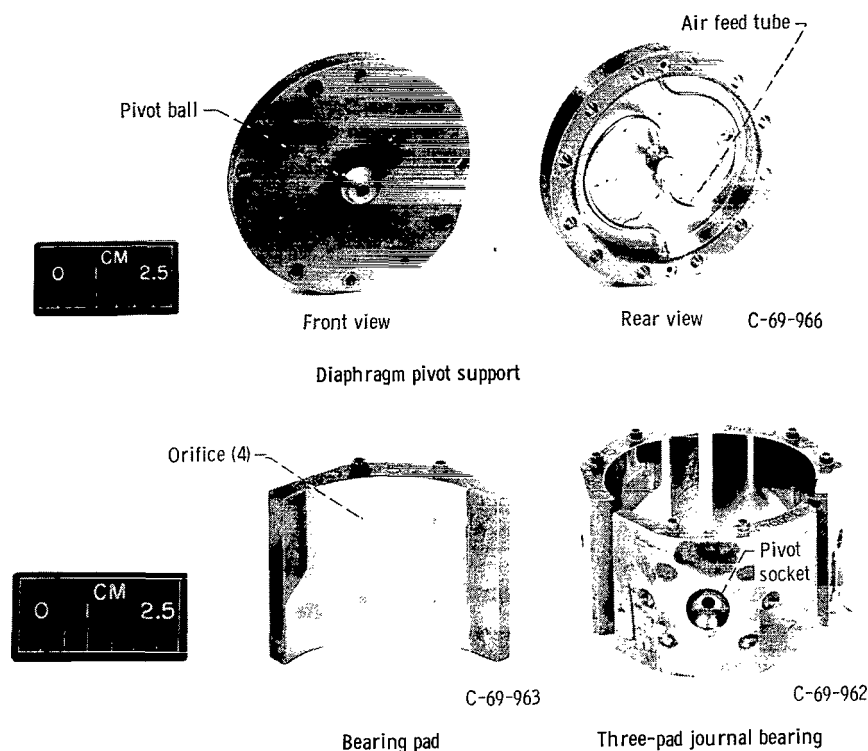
Tilting-pad journal bearing and diaphragm pivot support.
